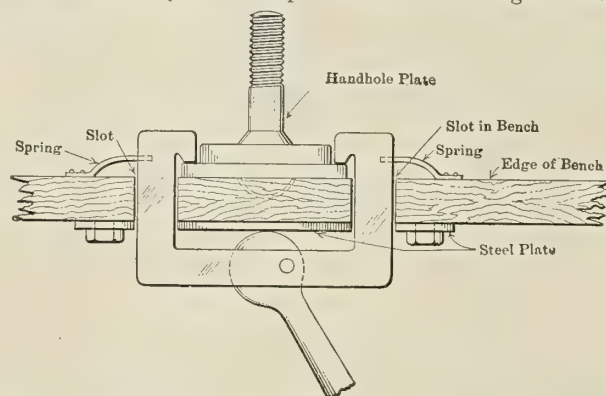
Clamping Rig for Babcock & Wilcox Handhole Plates While Running Die Over Studs
